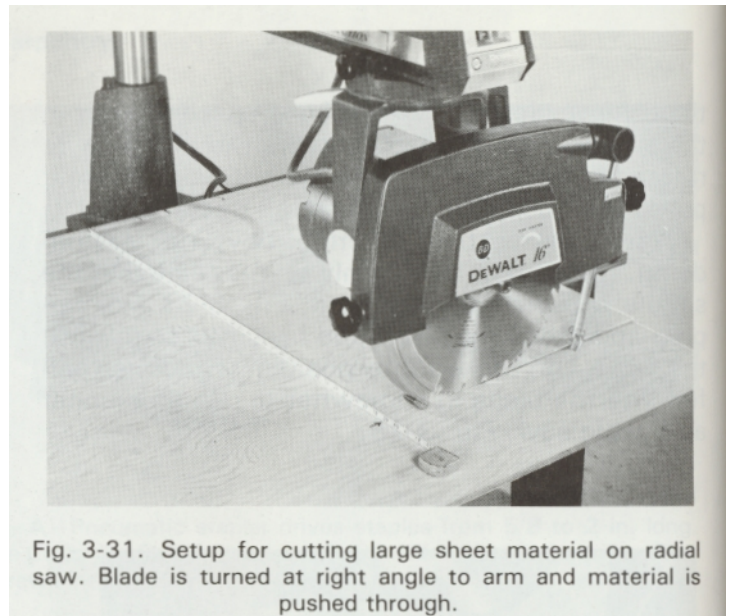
Setup for cutting large sheet material on radial saw. Blade is turned at right angle to arm and material is pushed through.
